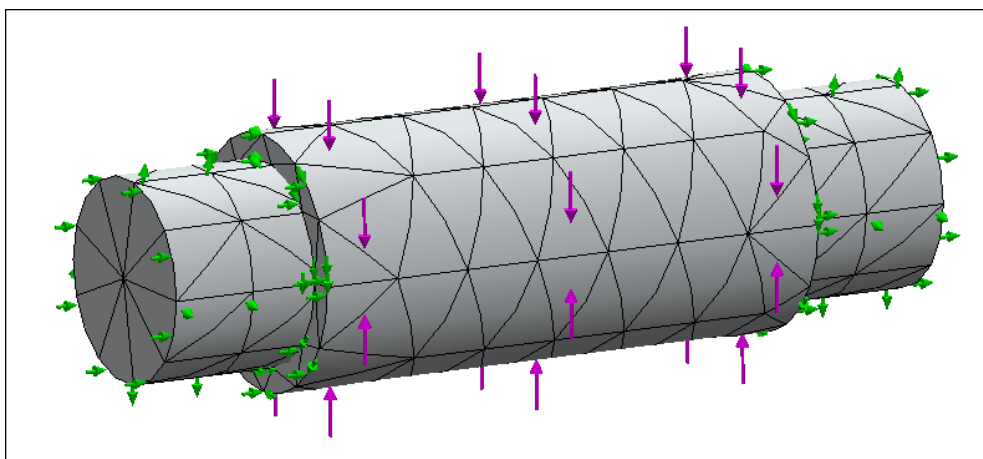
, Journal Bearing and Shaft FEA Model with Initial Conditions Shown
